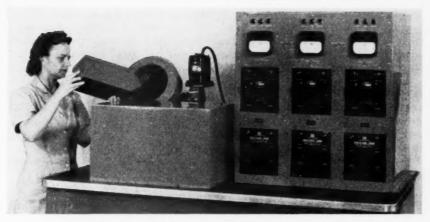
An hour's supply of gaging is shown being poured into a hopper.
